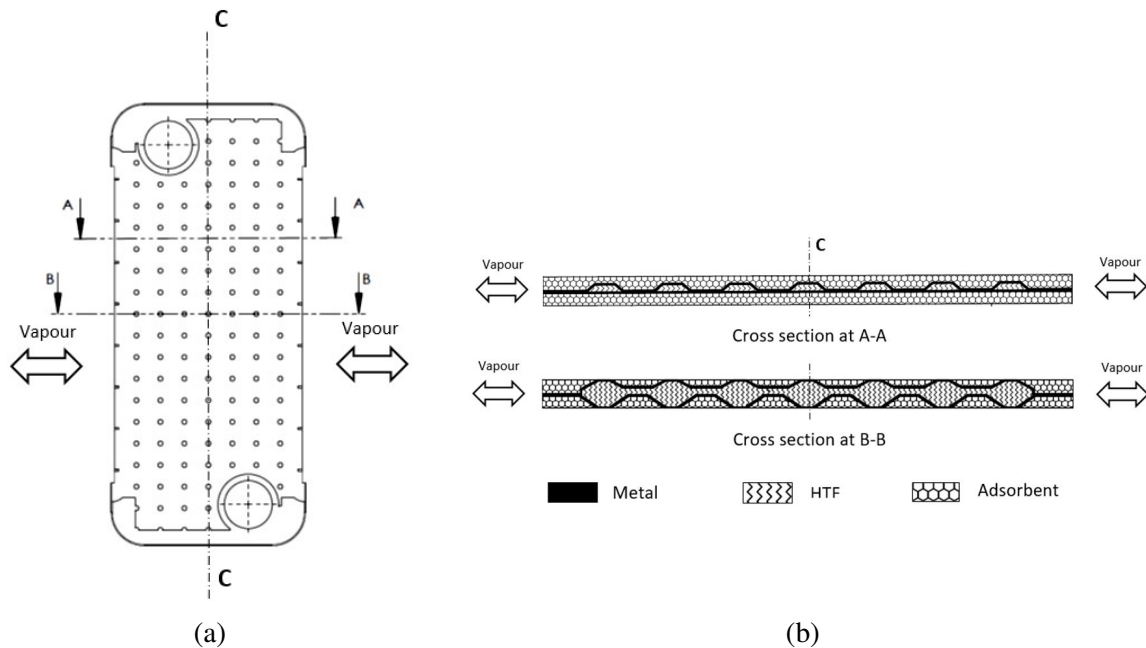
Cross sections in two successive plate pairs of the GLX30 APHE. (a) 2-D sketch of one of the plate-pairs, (b) Cross sections at A-A and at B-B
